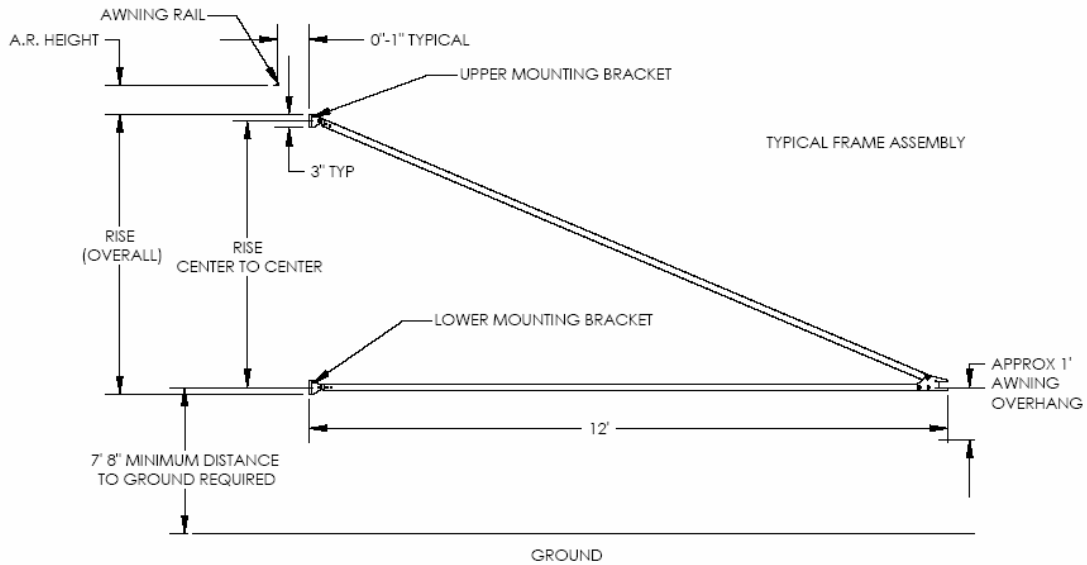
Typical frame assembly (cantilever not shown, awning rail on cantilever style is mounted on top of the trailer)
